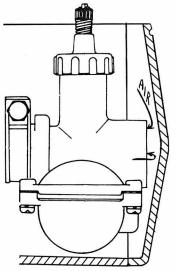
It may be necessary to modify carburetor covers or space covers out to prevent restriction of air to carburetor.
